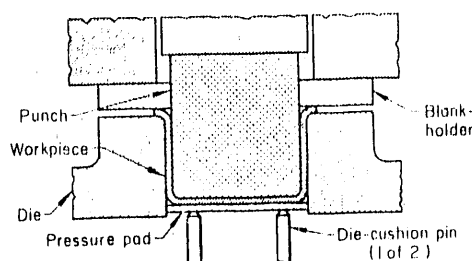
Deep drawing of cup (reprinted from ASM, 1969)
